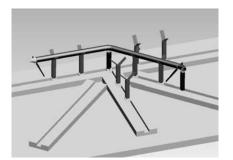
Illustration of the flexible fixtures developed in demonstrator 2.
